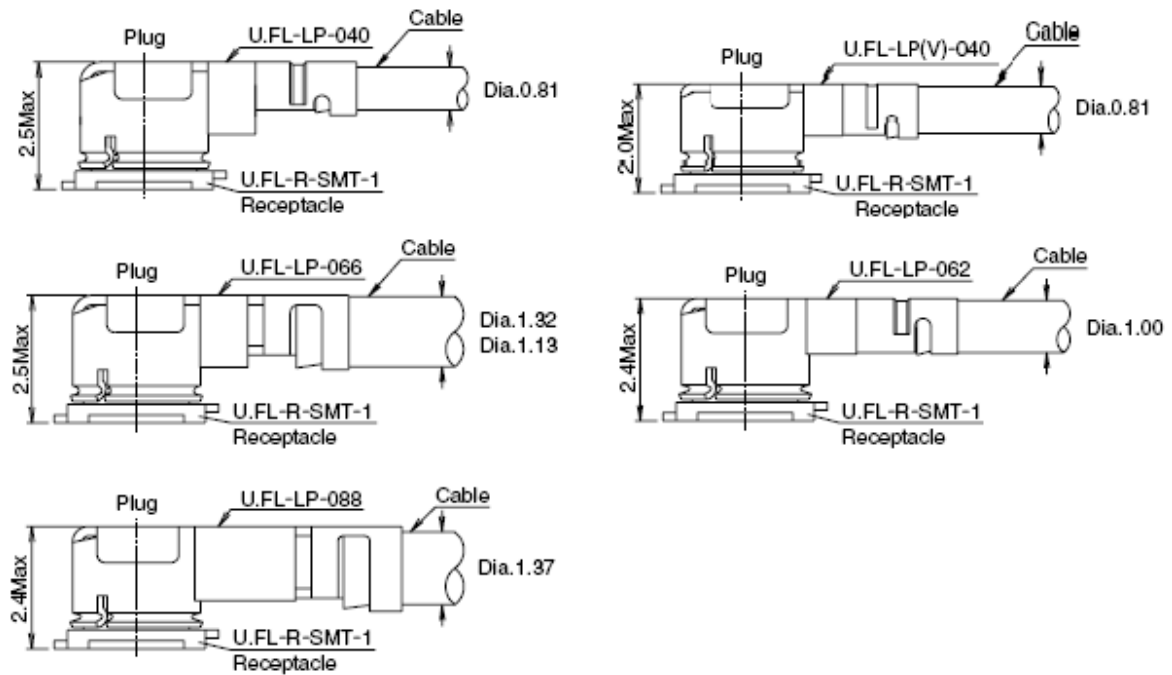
Dimensions of the U.FL-R-SMT Connector (Unit: mm)
